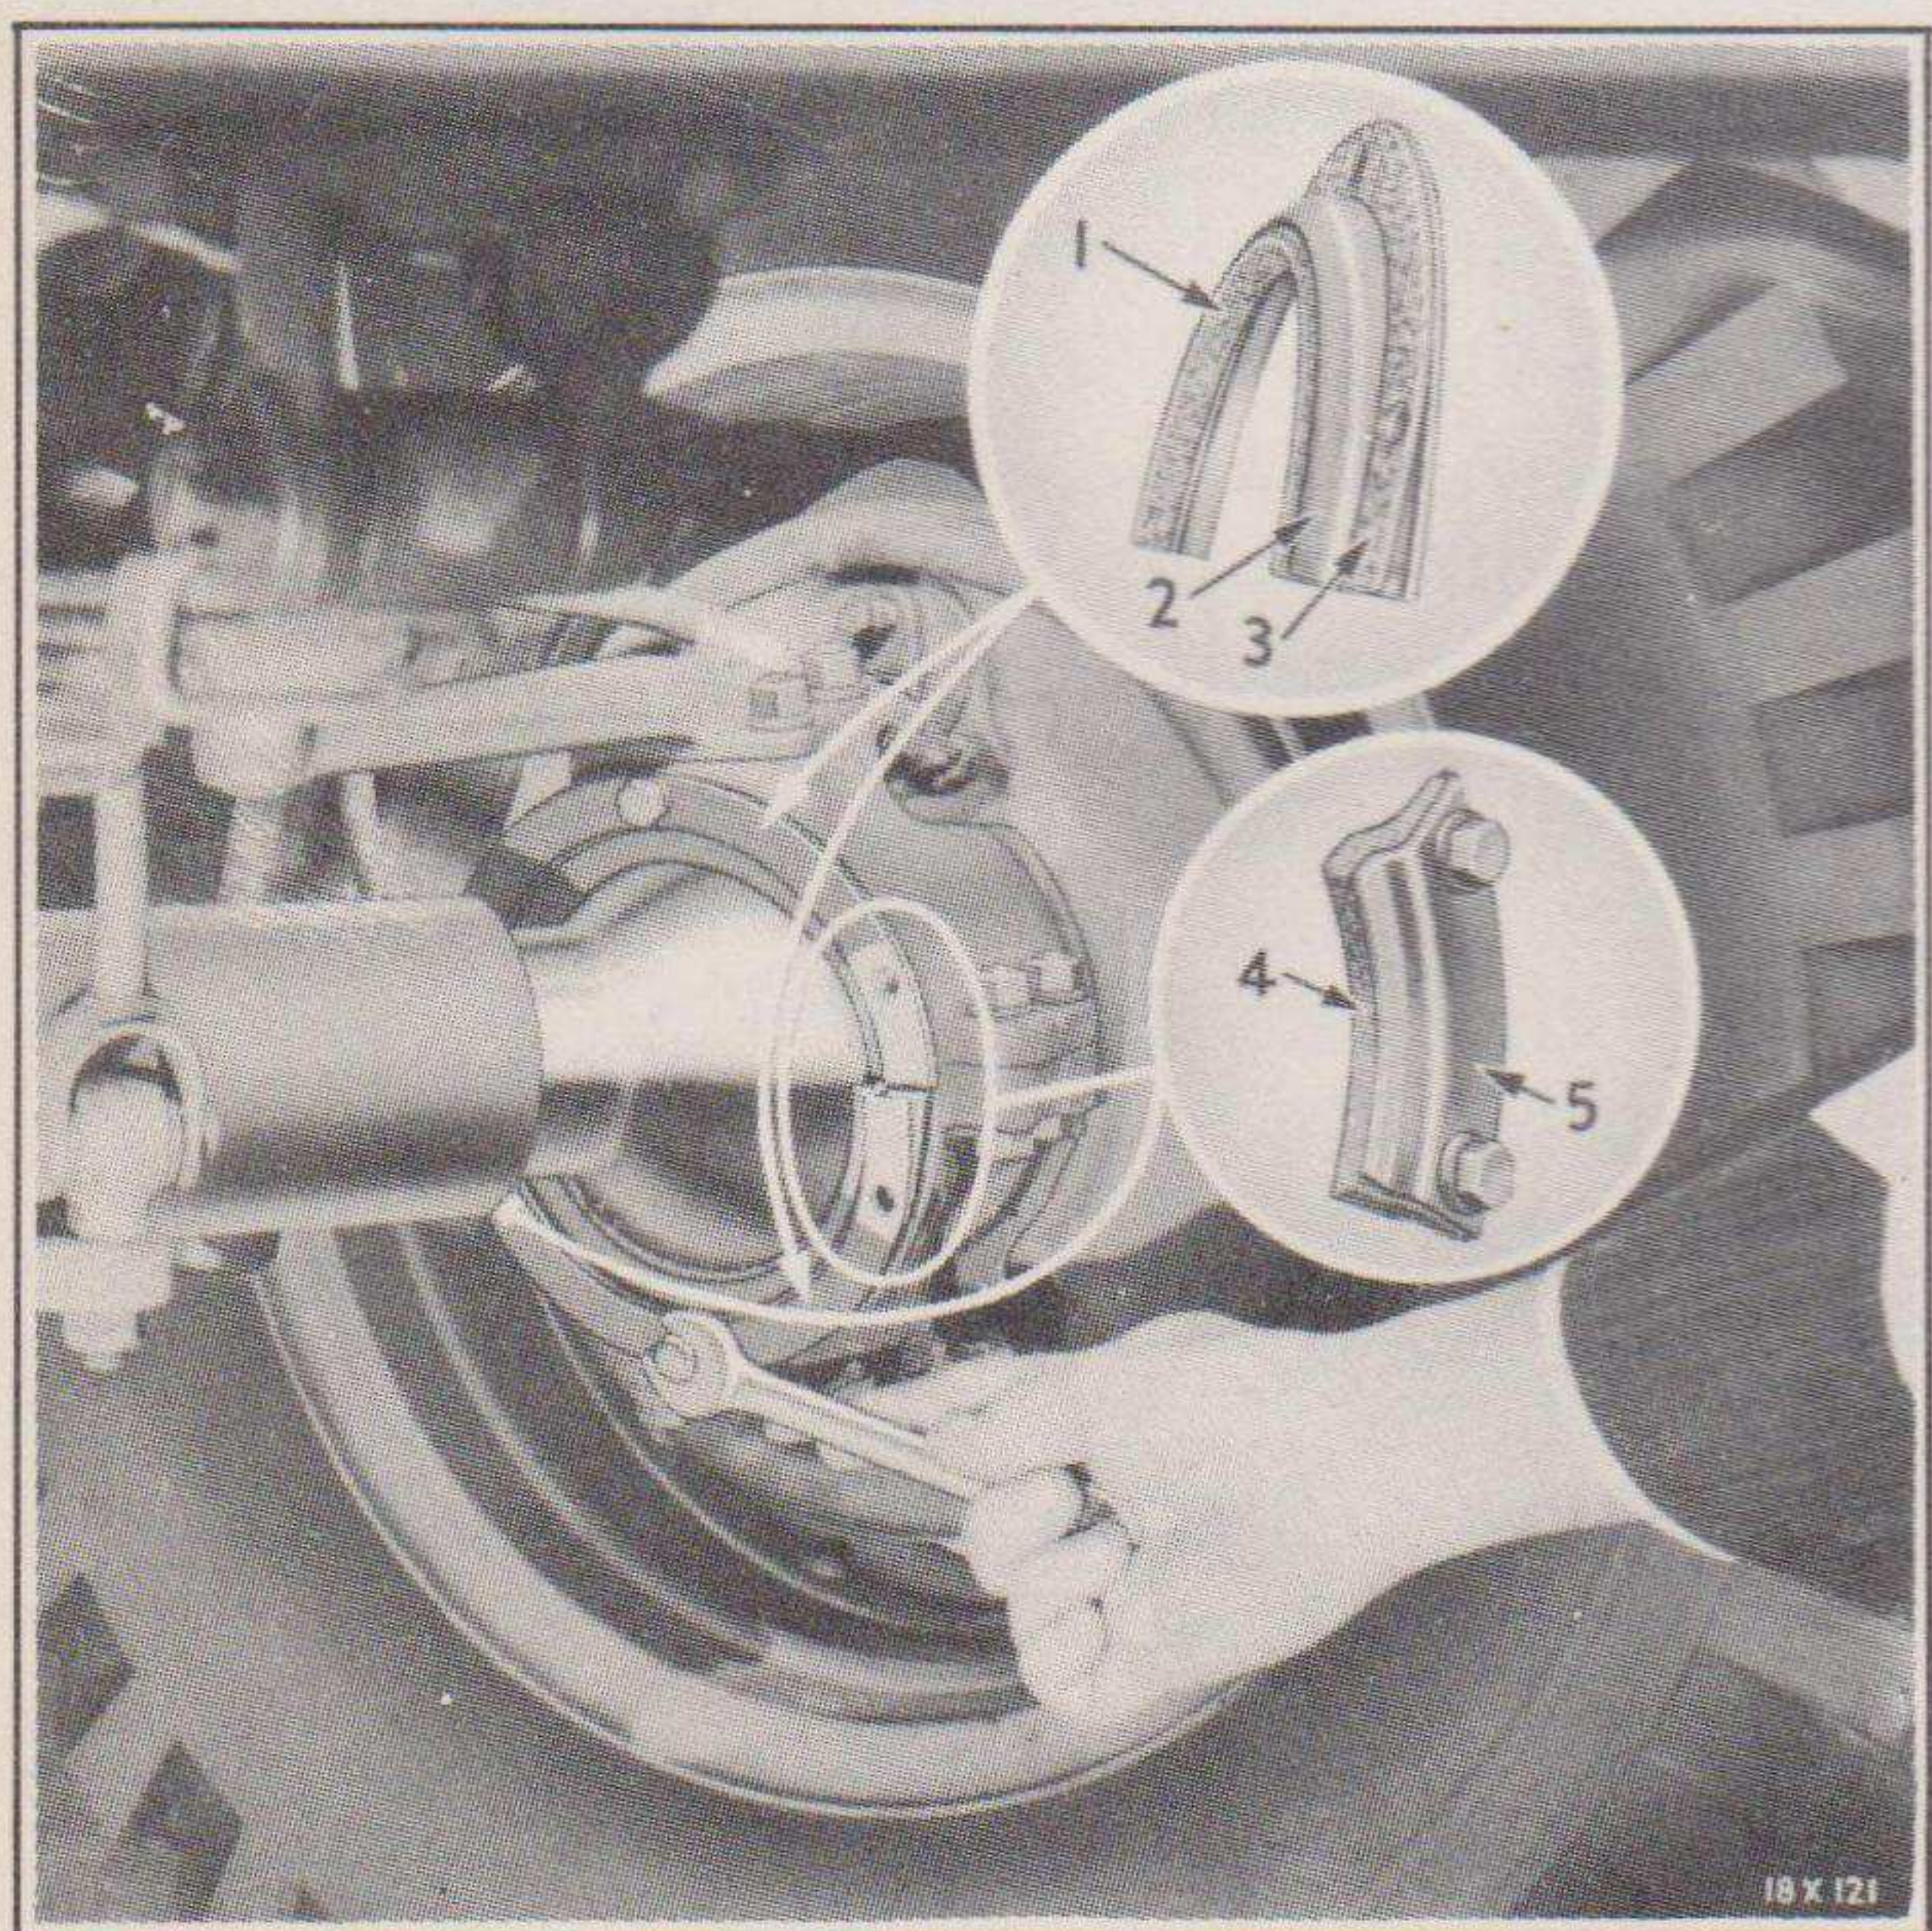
Removing Steering Knuckle Flange Oil Seals
